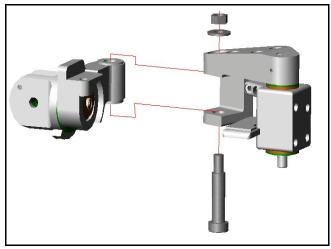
Shoulder Support / Yoke Mount exploded assembly
